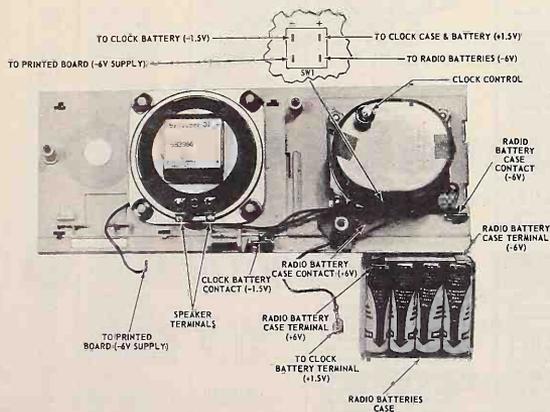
Rear view of cabinet front with printed circuit chassis removed.
